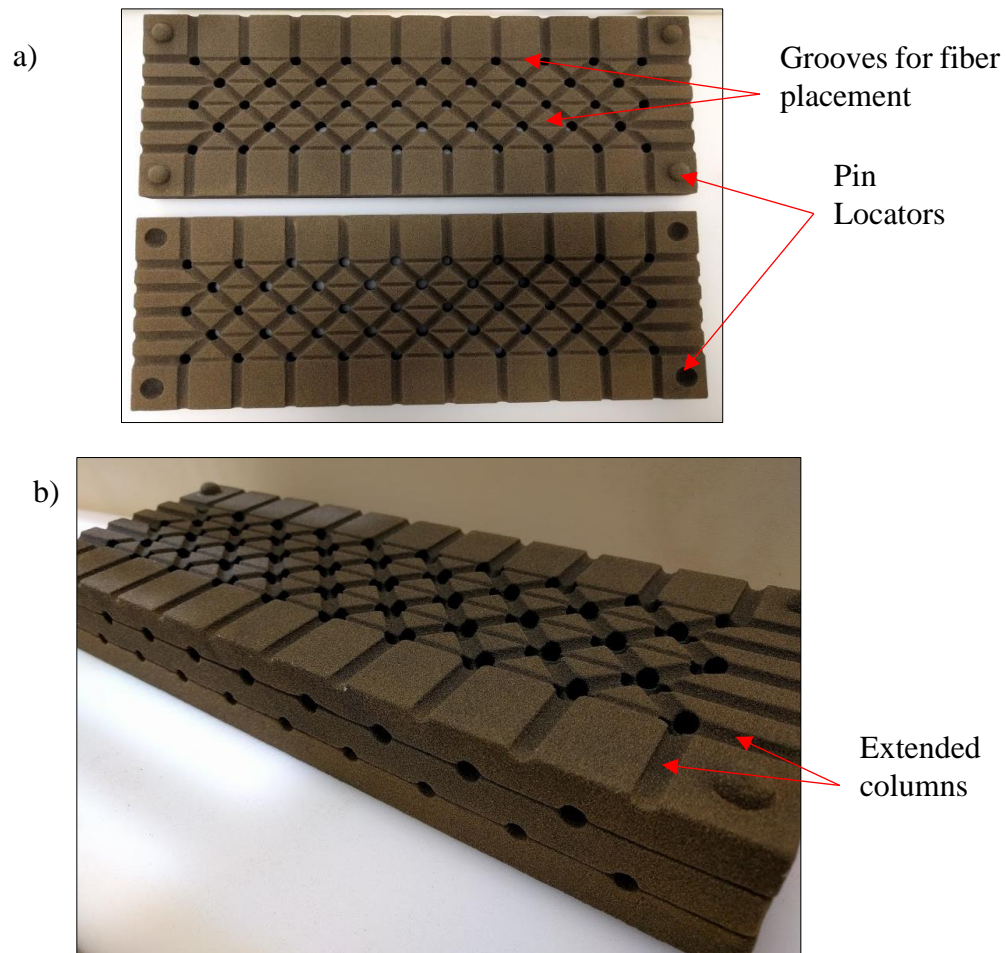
3D printed sand molds (a) Split molds (b) Split mold assembly
